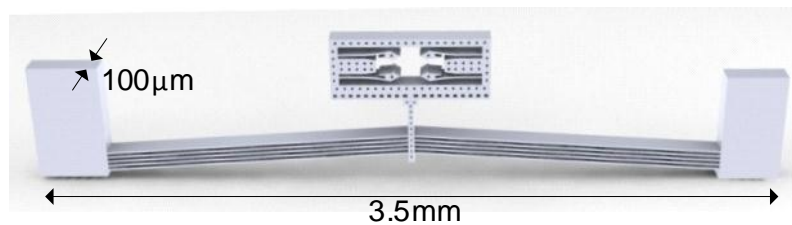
CAD drawing of the chevron actuator used in laser experiments.
